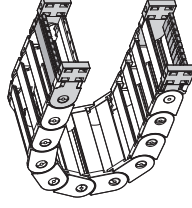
Fig. A Chain fixed outside/inside the radius. (Fig. A)
